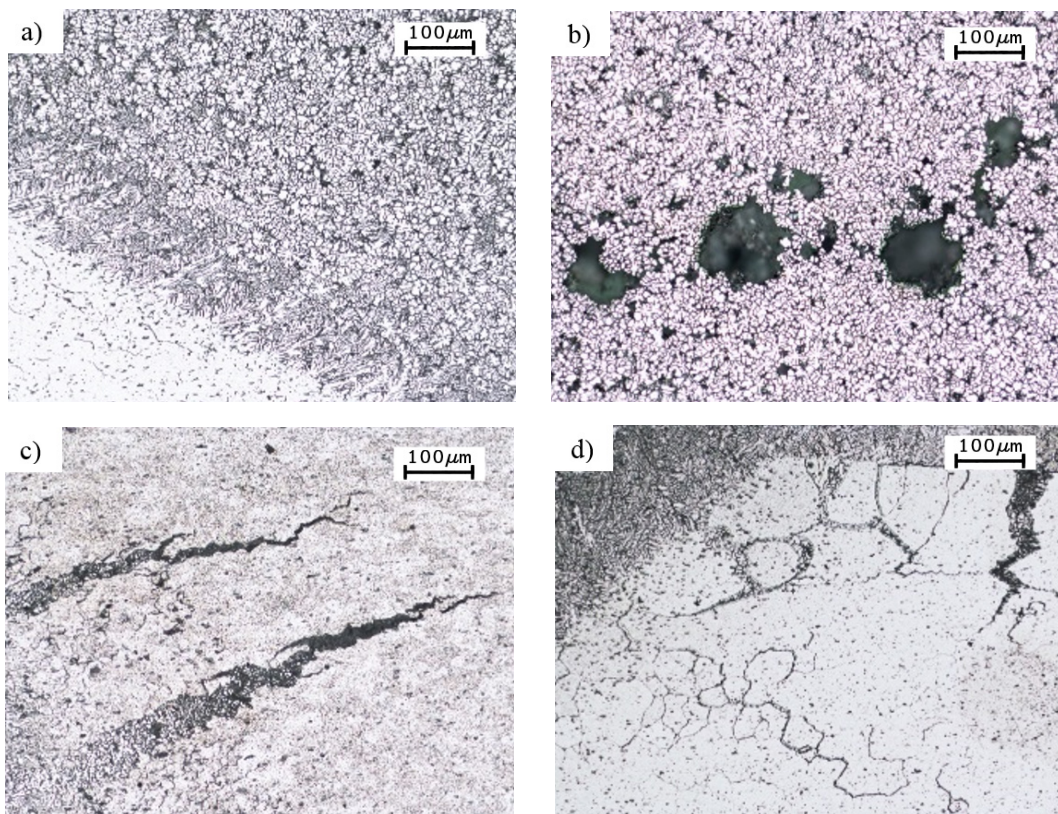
a) penetration area and welding nugget; b) porosity in the welding nugget; c) cracks in sheet EN AW5754 H24; d) cracks in sheet EN AW6005 T606, etched with Ma1Al
